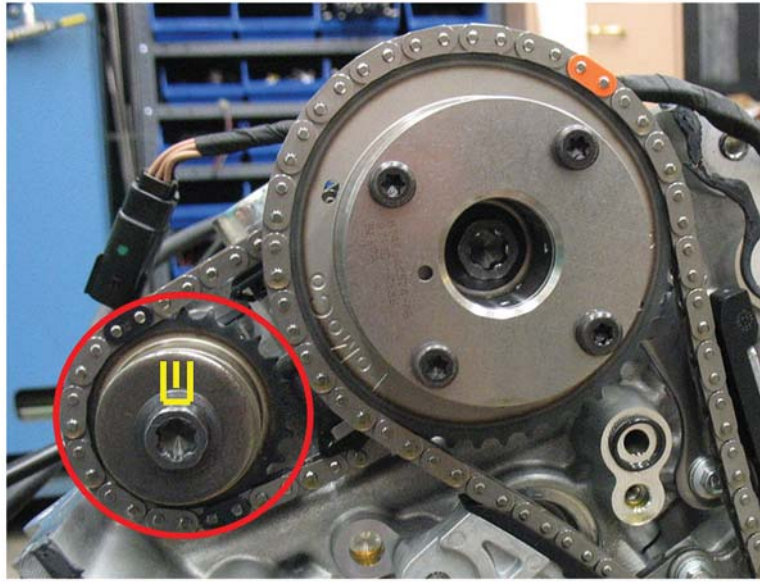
Photograph of Bank 1 Exhaust Cam Timing Gear
